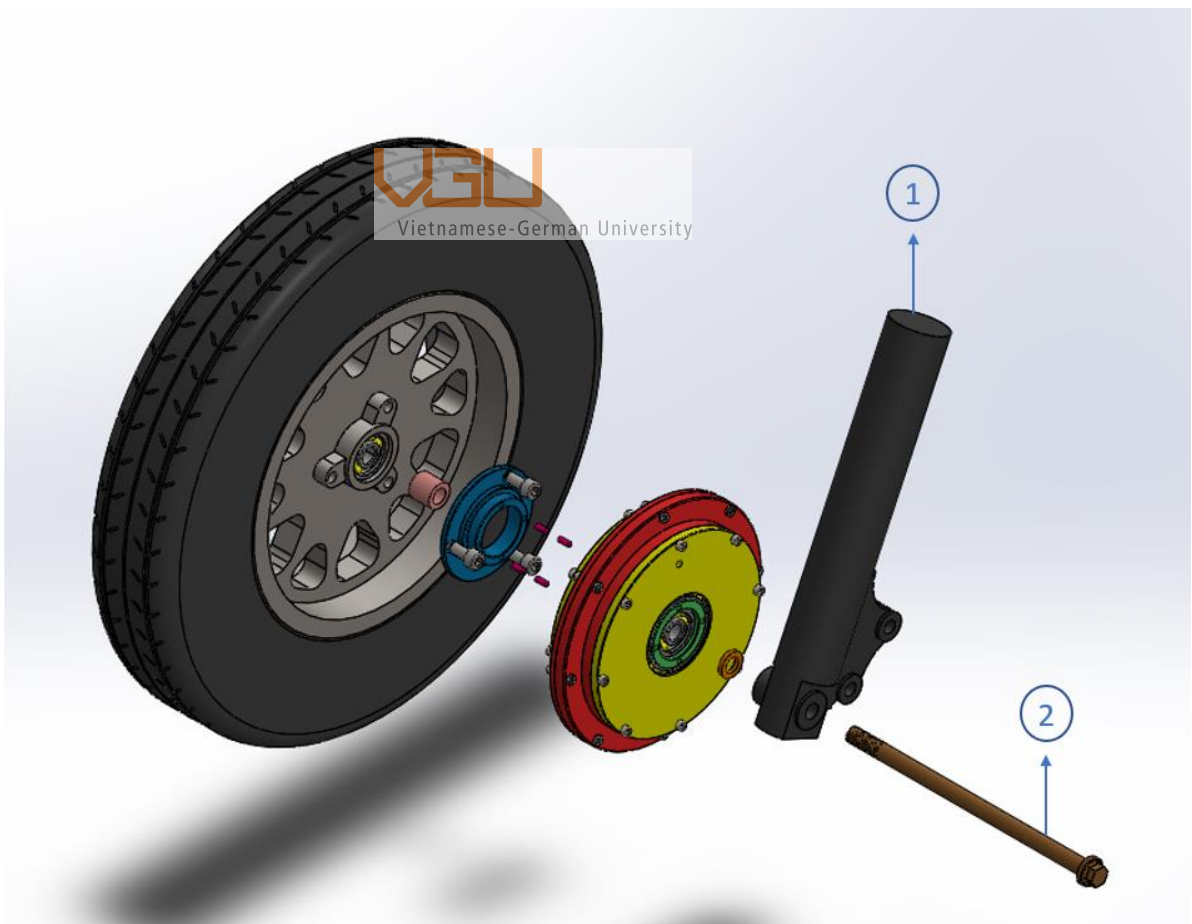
Explore view of front wheel with MR brake; 1: Front shaft holder, 2: Front wheel shaft.
